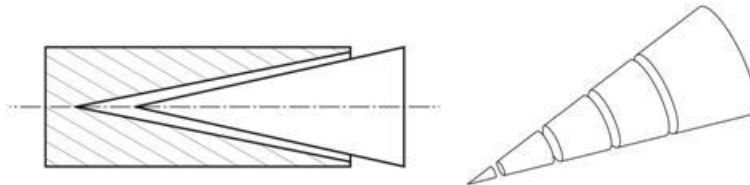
Conical machining and cutting after gaseous charging of the samples
